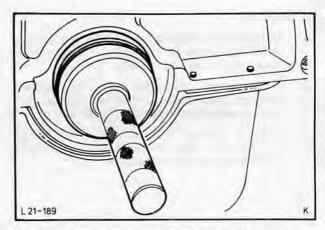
Drive in oil seal, using Special Tool 21-011-A
